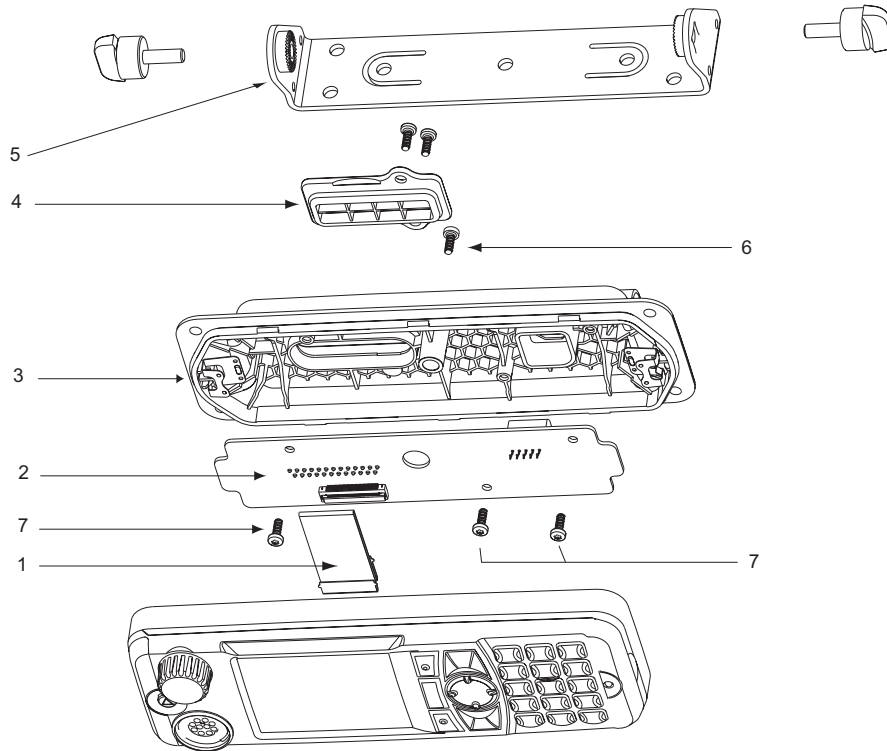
Data Expansion Head Enhanced - Exploded View
